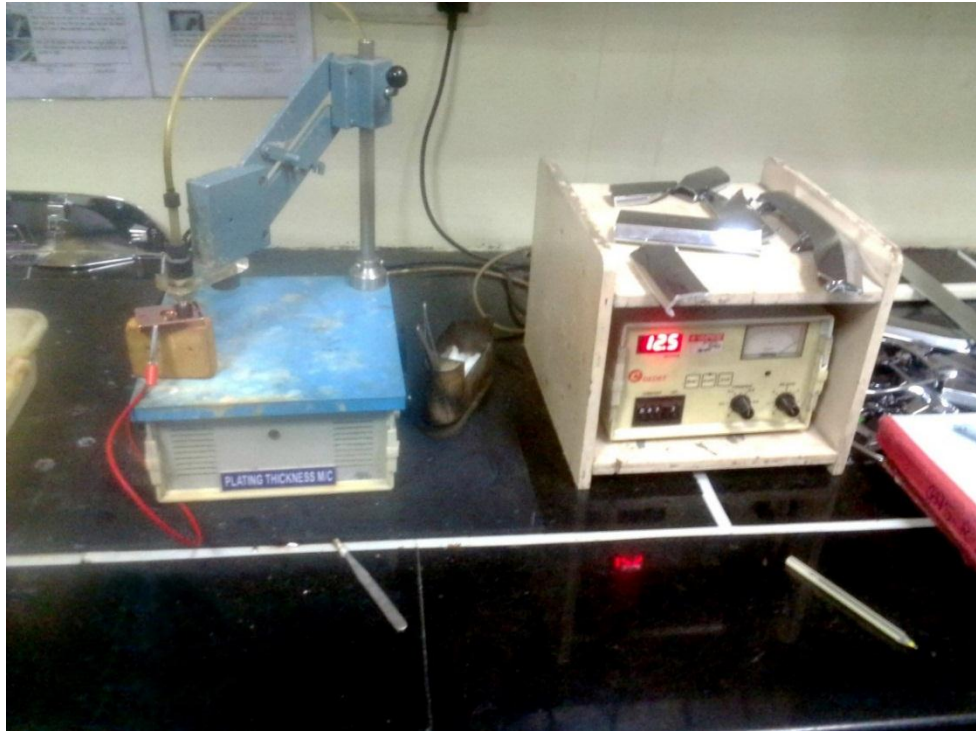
PHOTOGRAPH SHOWING COATING THICKNESS TEST
